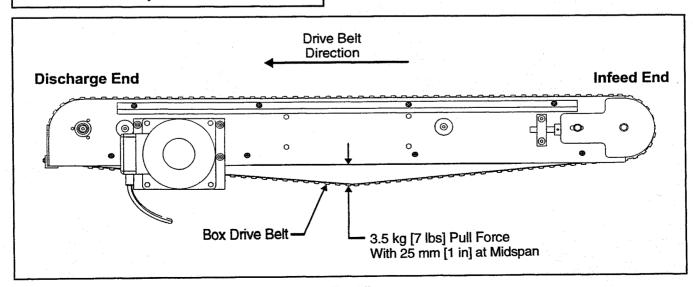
Box Drive Belt Tension Adjustment, Top View
